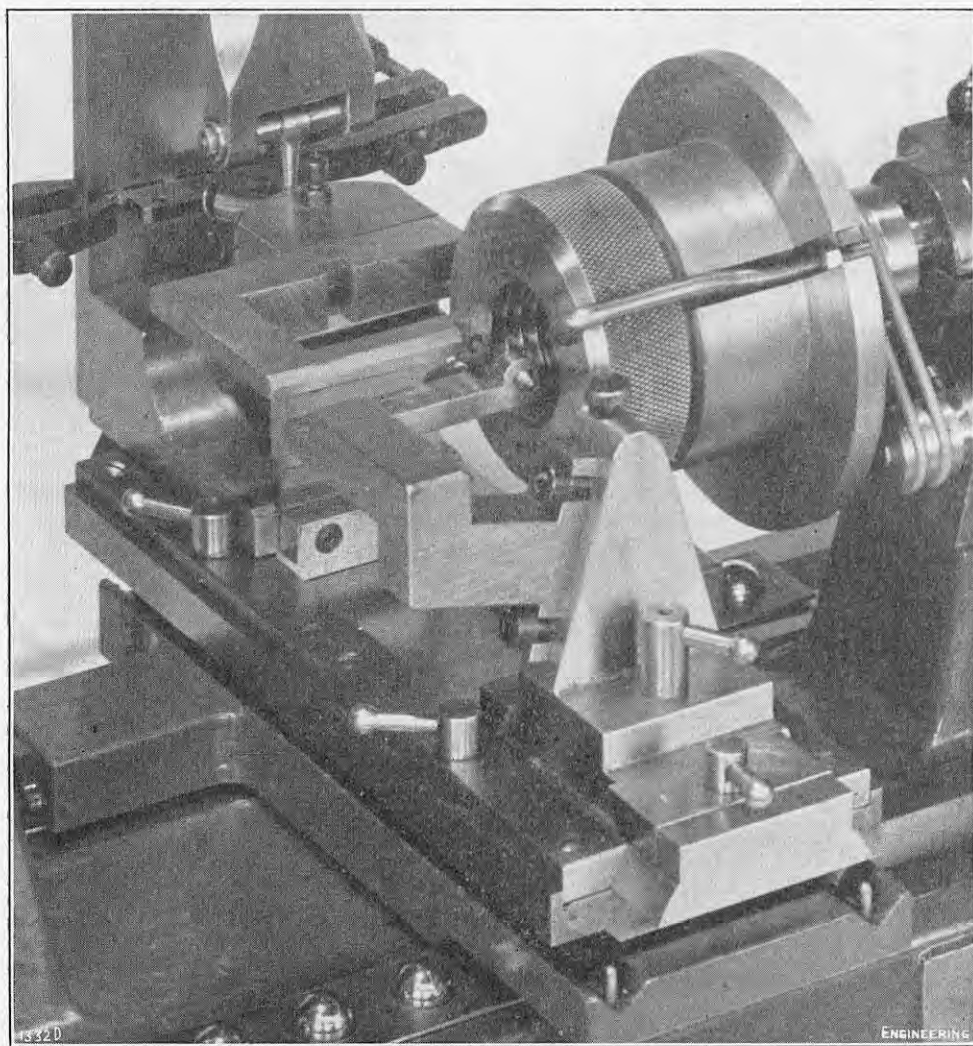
MACHINE MODIFIED FOR MEASURING SCREW RING GAUGES.
